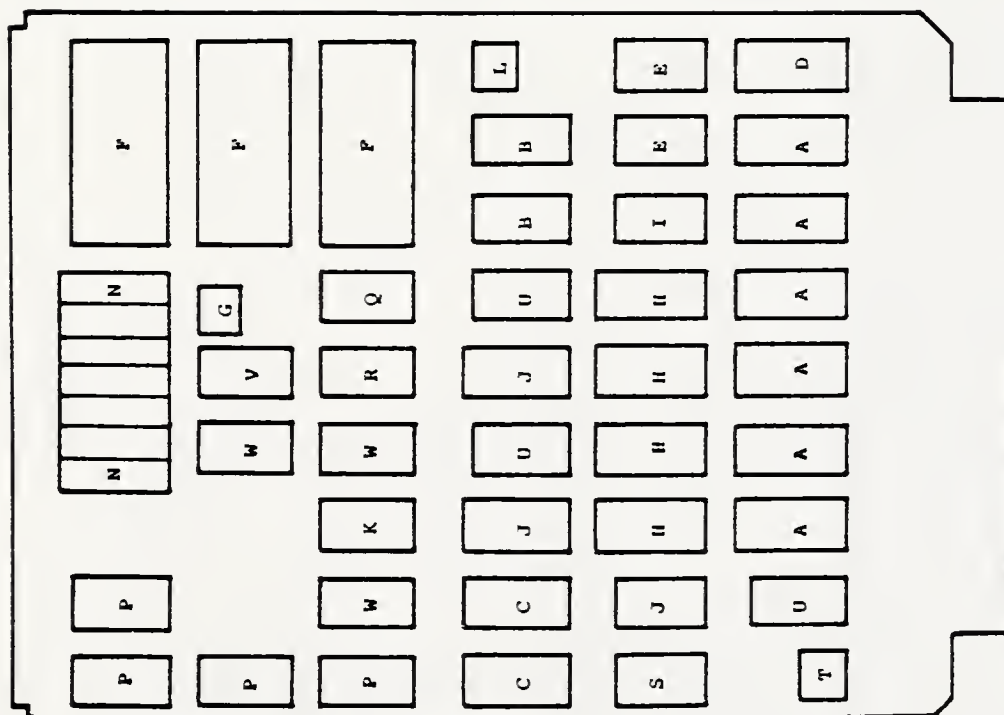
PACKAGE LAYOUT BOARDS 1-4
